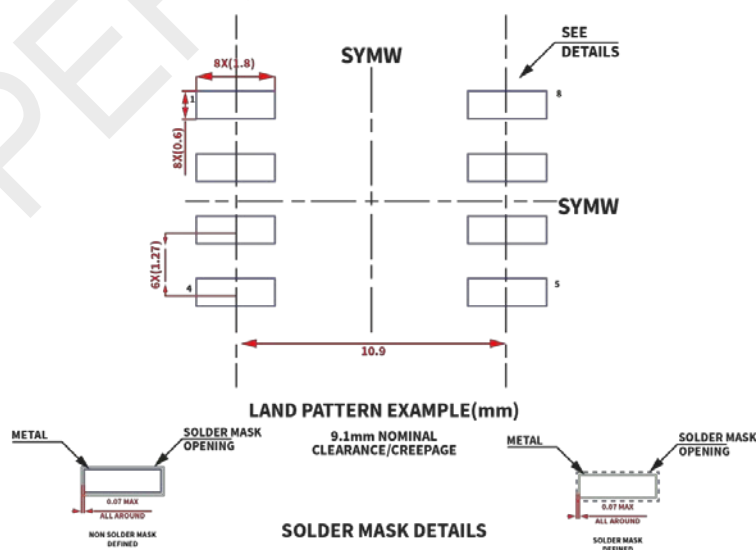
CMT10XXX SOW8L Package Board Layout Example
